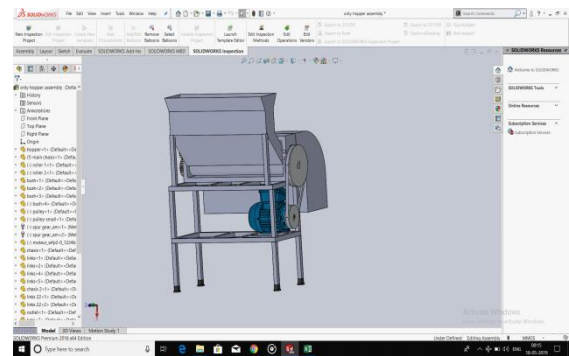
Side View of the Final Ginning Machine (Cad Model)
